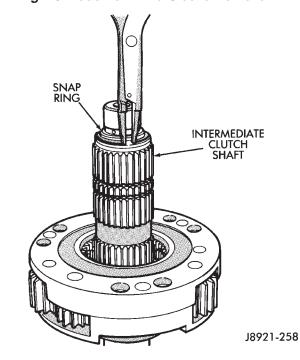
Intermediate Clutch Shaft Snap-Ring Removal
